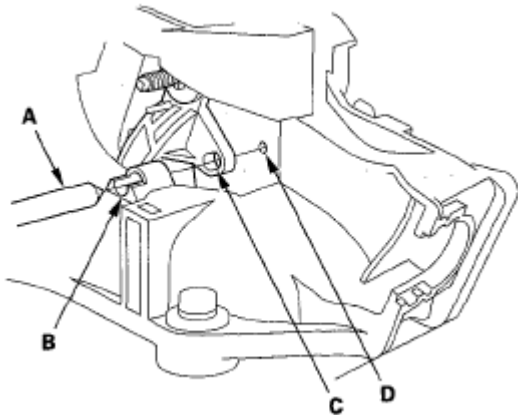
Identifying Positioning Hole On Shift Lever And Shift Lever Bracket Base
